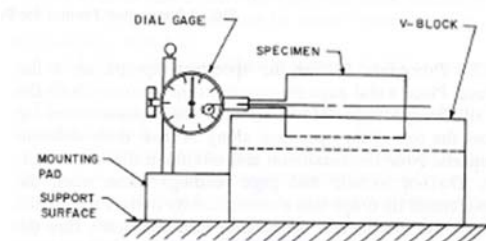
Assembly for Determining the Flatness and Perpendicularity of End Surfaces to the Specimen Axis (6.2.1, Procedure A)
